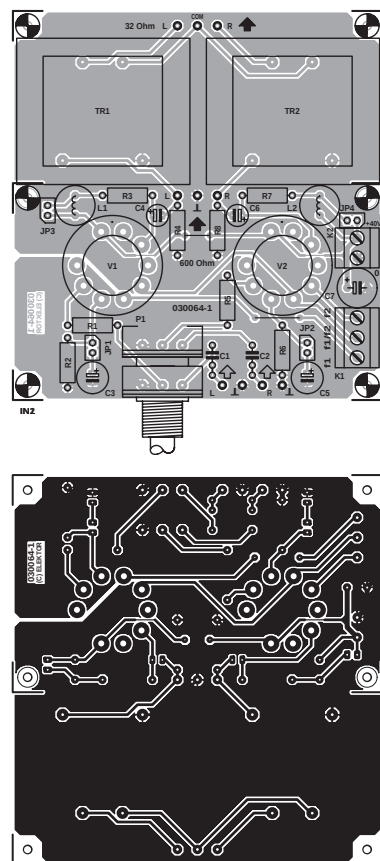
The printed circuit board layout is shown with a separate 32- Ω section.
